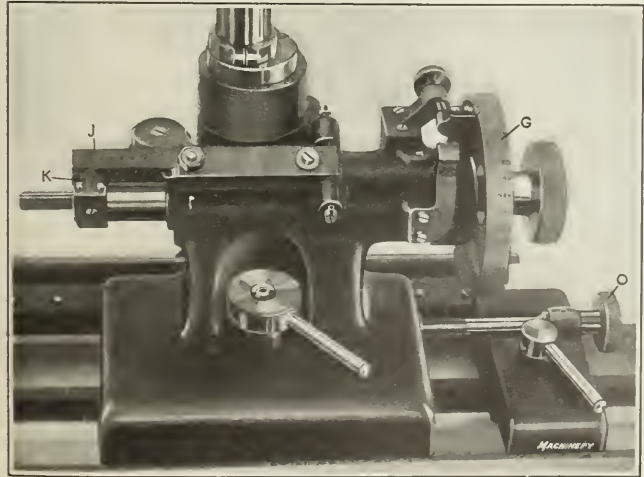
Close View of Pratt & Whitney Measuring Machine, showing Graduated Wheel and Vernier Scale
